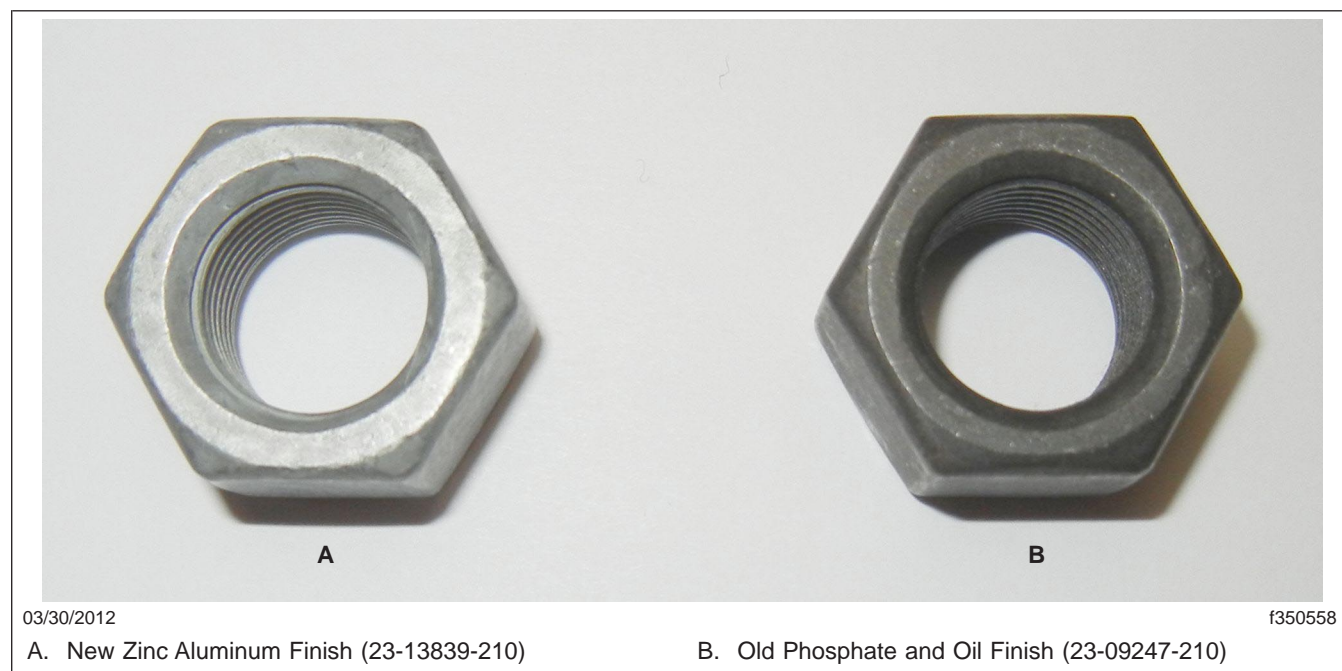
, Axle Shaft Flange Nuts, New and Old Finishes
